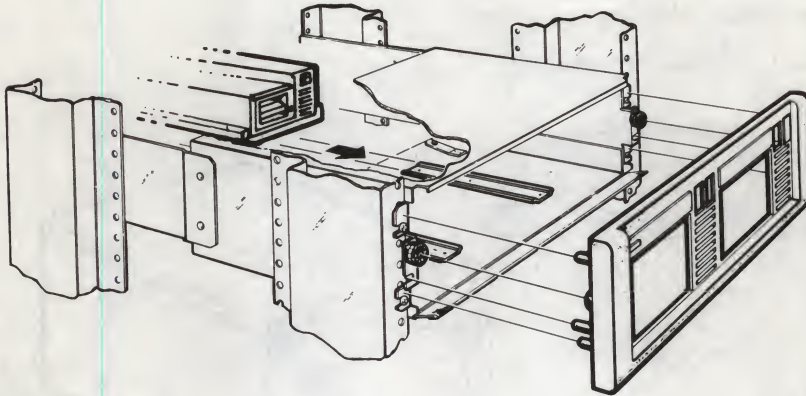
Installing a TK50-R Tape Drive in a Rack Mount Assembly
